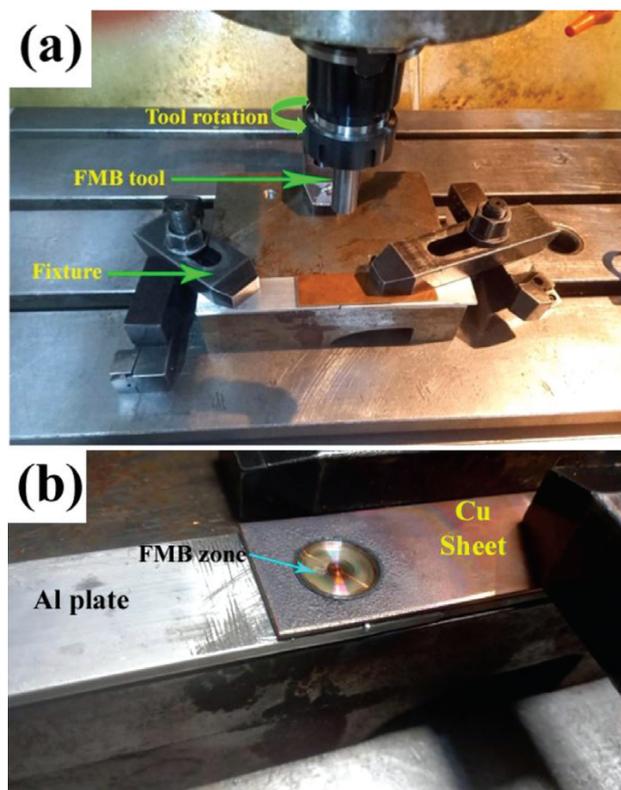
Experimental set-up with: a) tool rotational direction and fixture design and b) FMB processed sample
